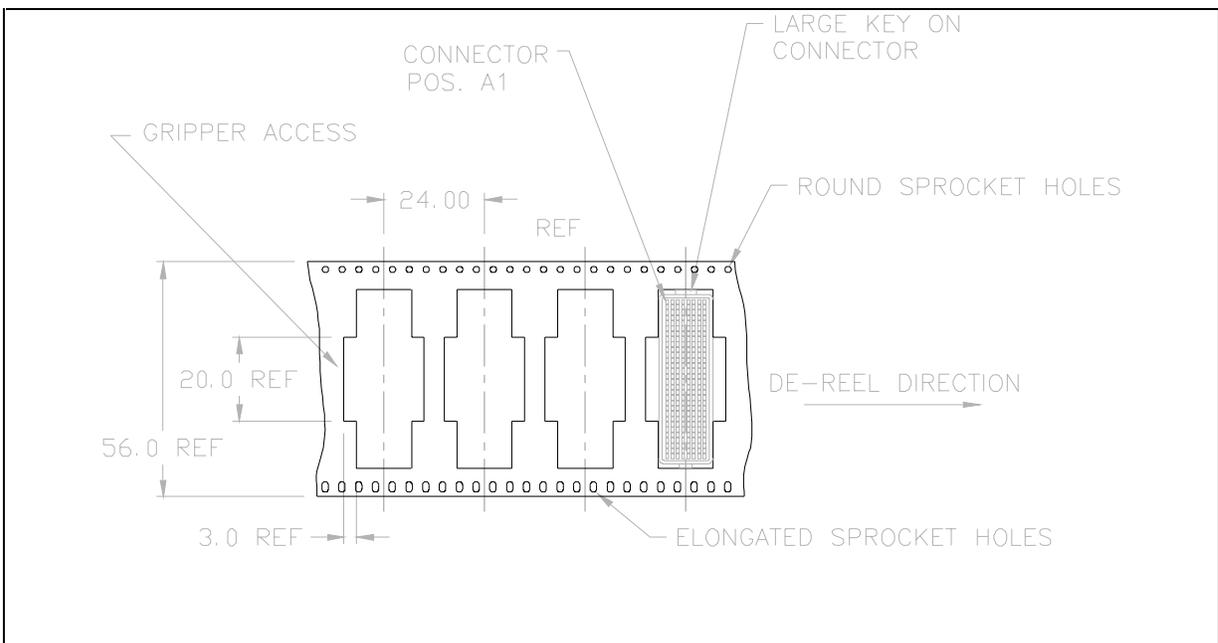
Tape and Reel Packaging (Dimensions in mm)
